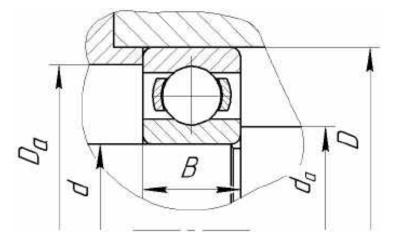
A single row deep groove ball bearing (GOST 8338-75)
